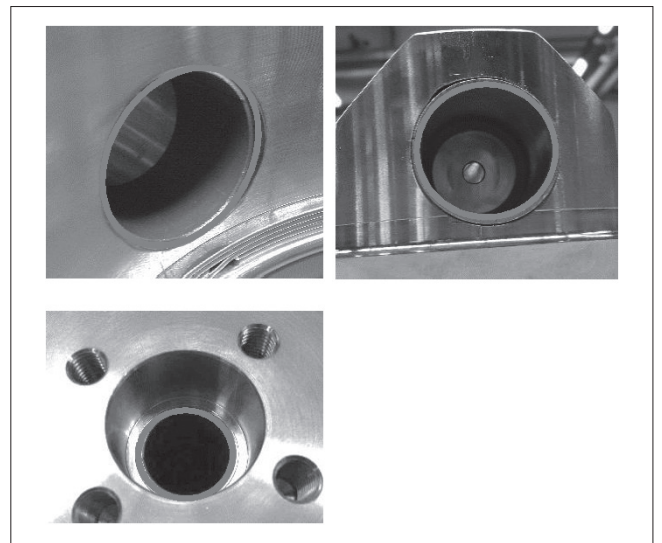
Inserted radial DUB bearings in body and disc and extension
